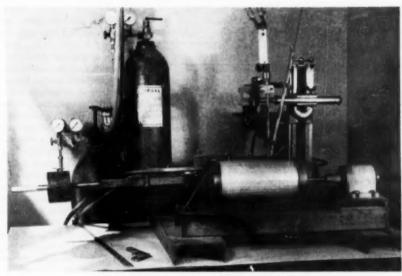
Machine for Deep Welding Small Cylinders With \(\frac{1}{8} \)-In. Wall. Speeds, up to 12 in. per min.
